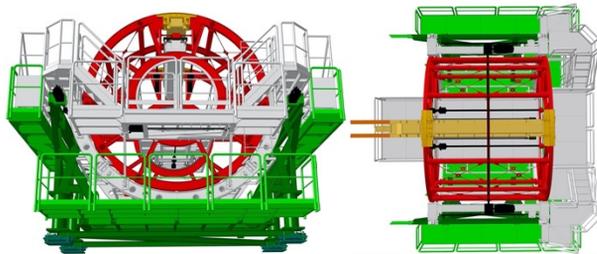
Rear and top views of the new Enfourneur 3D CAD model with electrical motors, translation screws and rack integrated (darkest parts).
